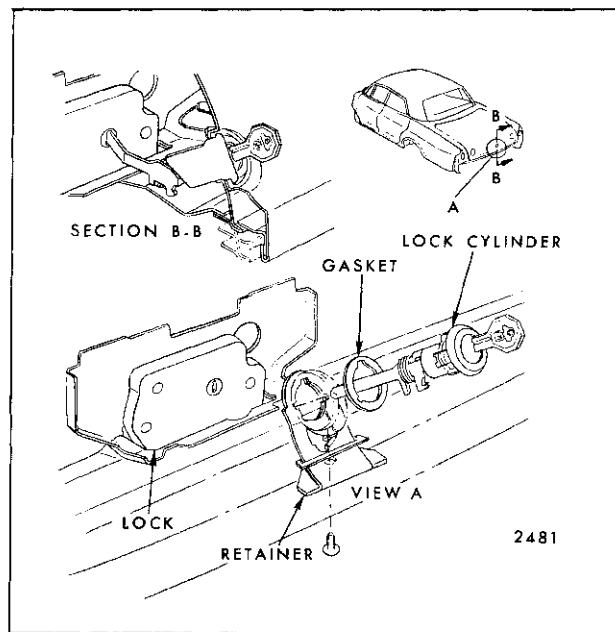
Rear Compartment Lid Lock Cylinder Assembly – Typical of All Styles Except "F", Pontiac "A" and All Cadillac Styles
